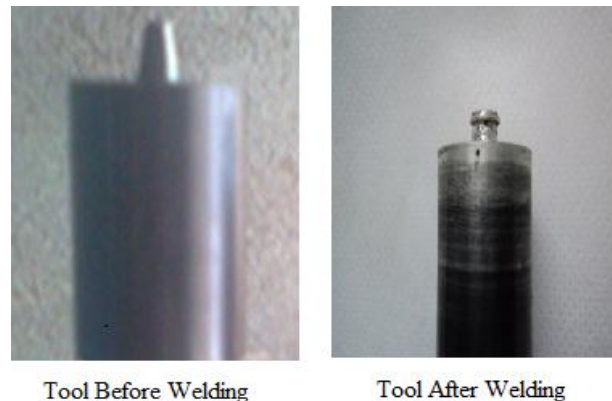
TiAlN coated HSS tool before and after welding^[9]
